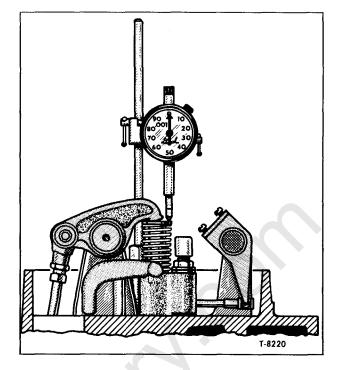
Checking Engine Timing by Measuring Injector Movement (Typical)
